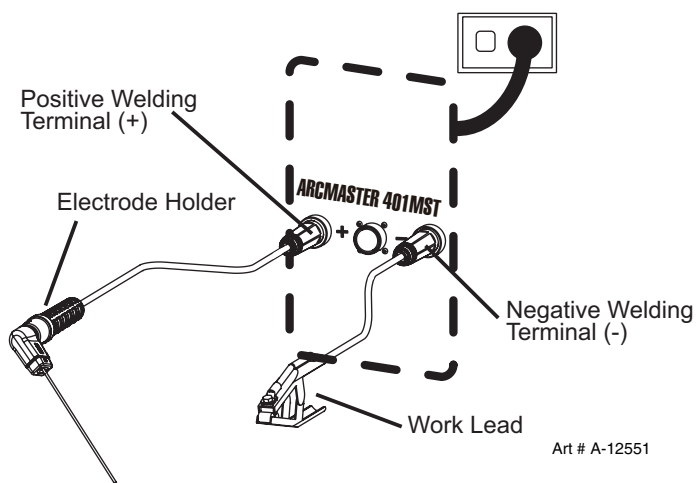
Setup for STICK (SMAW) Welding
